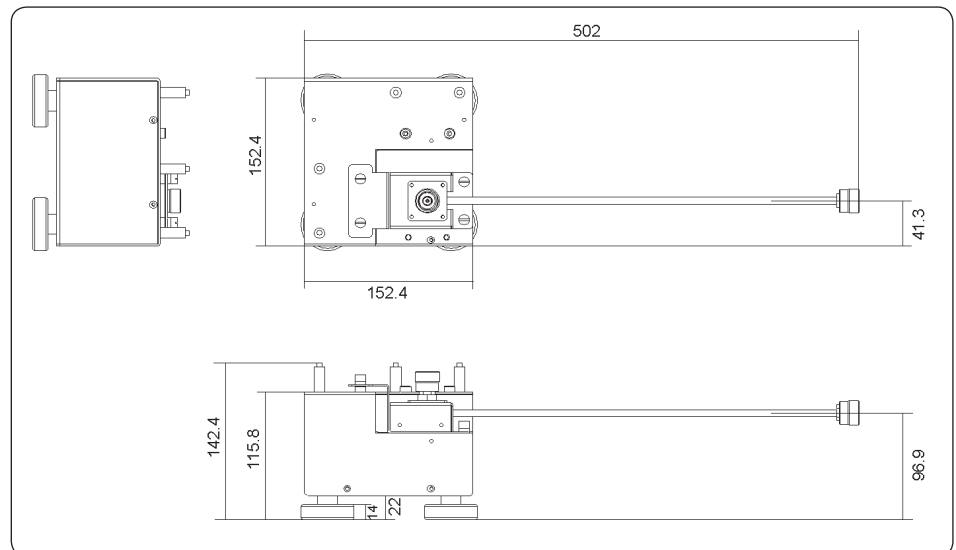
Option E4991A-007 test head dimensions (in millimeters, nominal)
